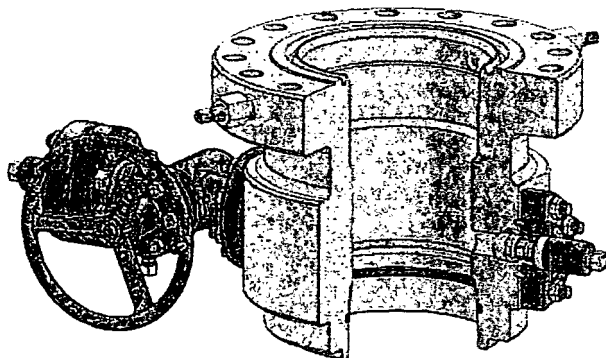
Slip-On Weld (SOW) Casing Head
